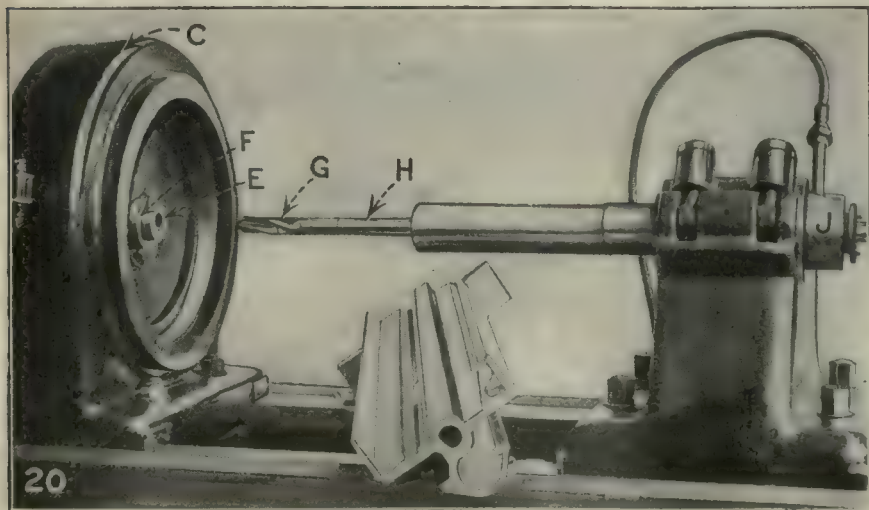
HOW DRILL IS DRIVEN AND LUBRICATED
